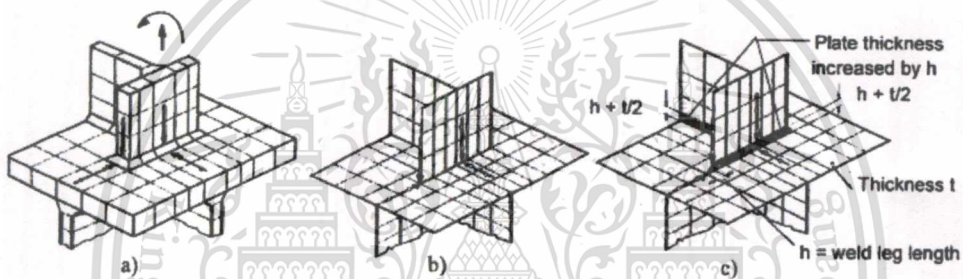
a) solid element model with weld modeling; b) shell element model without weld modeling; c) attachment welds modeled with reinforced plate strips (Niemi E. et al.).
